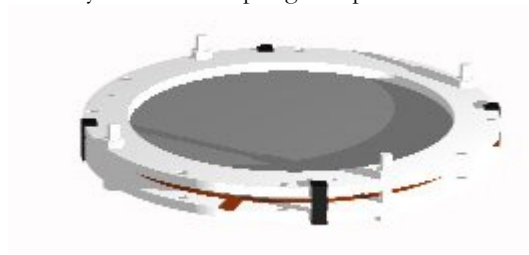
Assembly of MCP-stack - Stage 3-3 (DLD40, DLD80 & HEX80)
